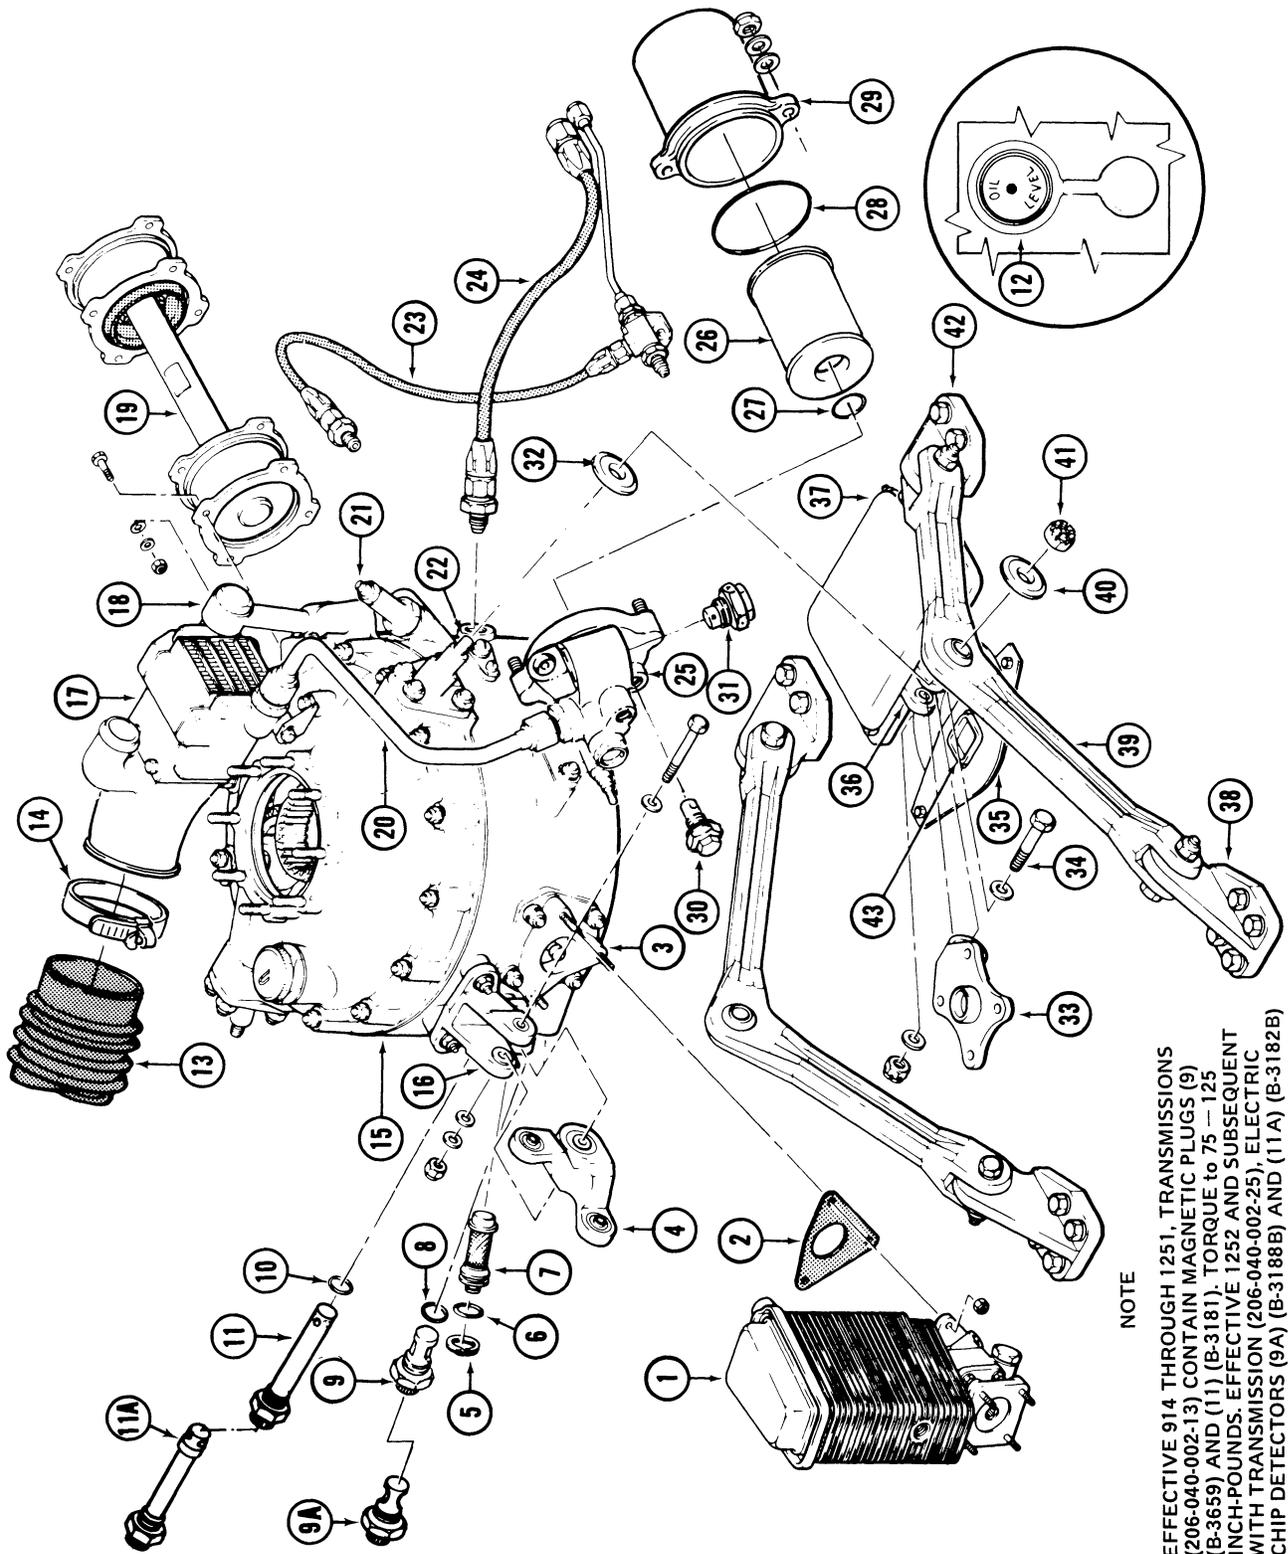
Main Transmission Assembly (206-040-002-13, -25, and -29) (Sheet 1 of 2) 206040-11-3A
